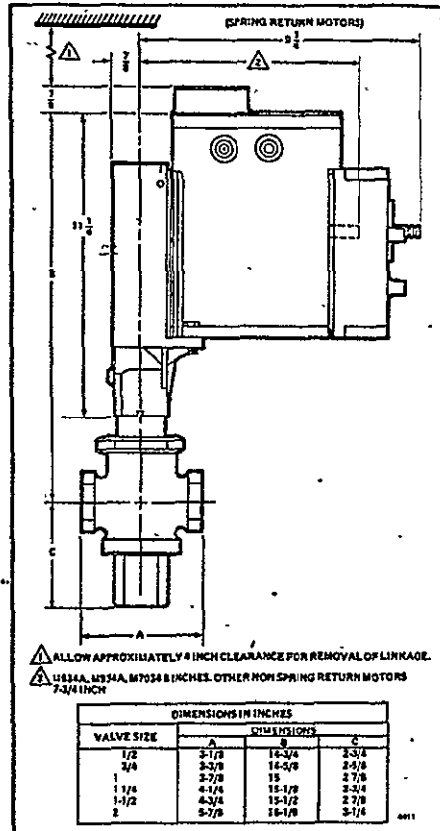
Mounting dimensions V5013A with Q618 Linkage.
